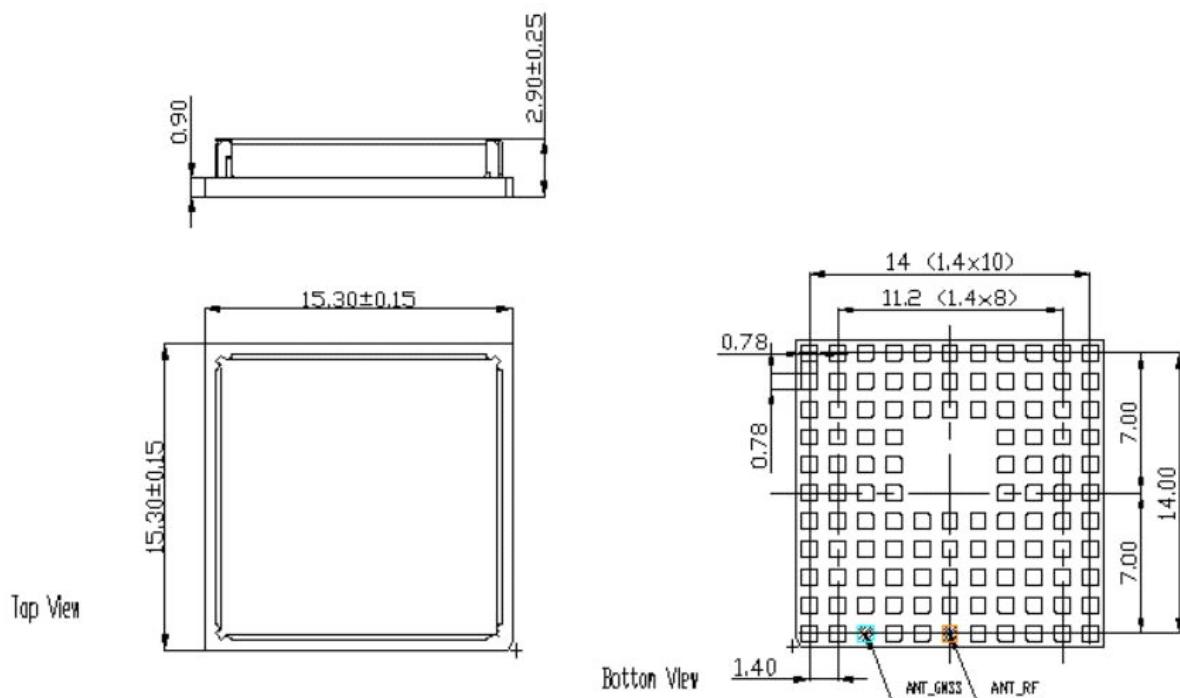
Dimensions of TX62-W (all dimensions in mm)
